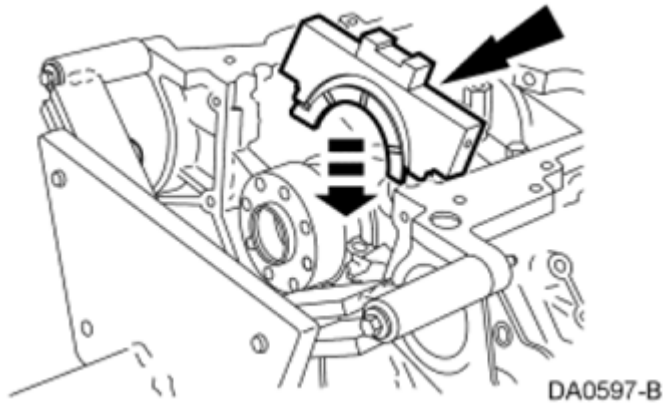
Installing Lower Crankshaft Thrust Washer To No. 5 Main Bearing Cap
